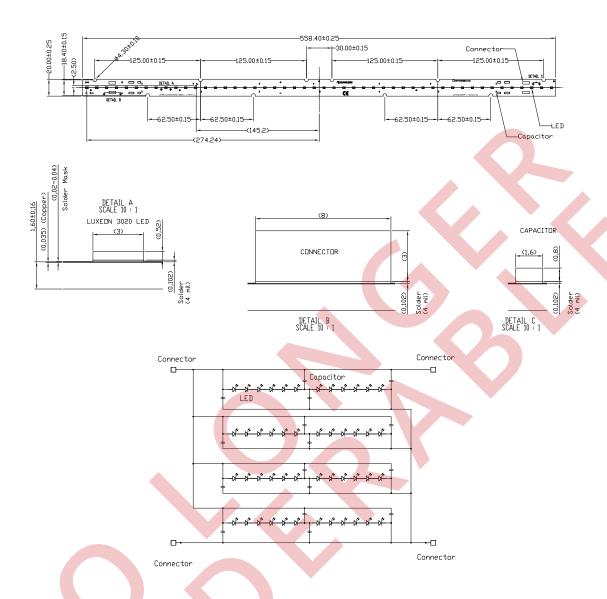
Mechanical dimensions for L218-xxxx048C00000.
